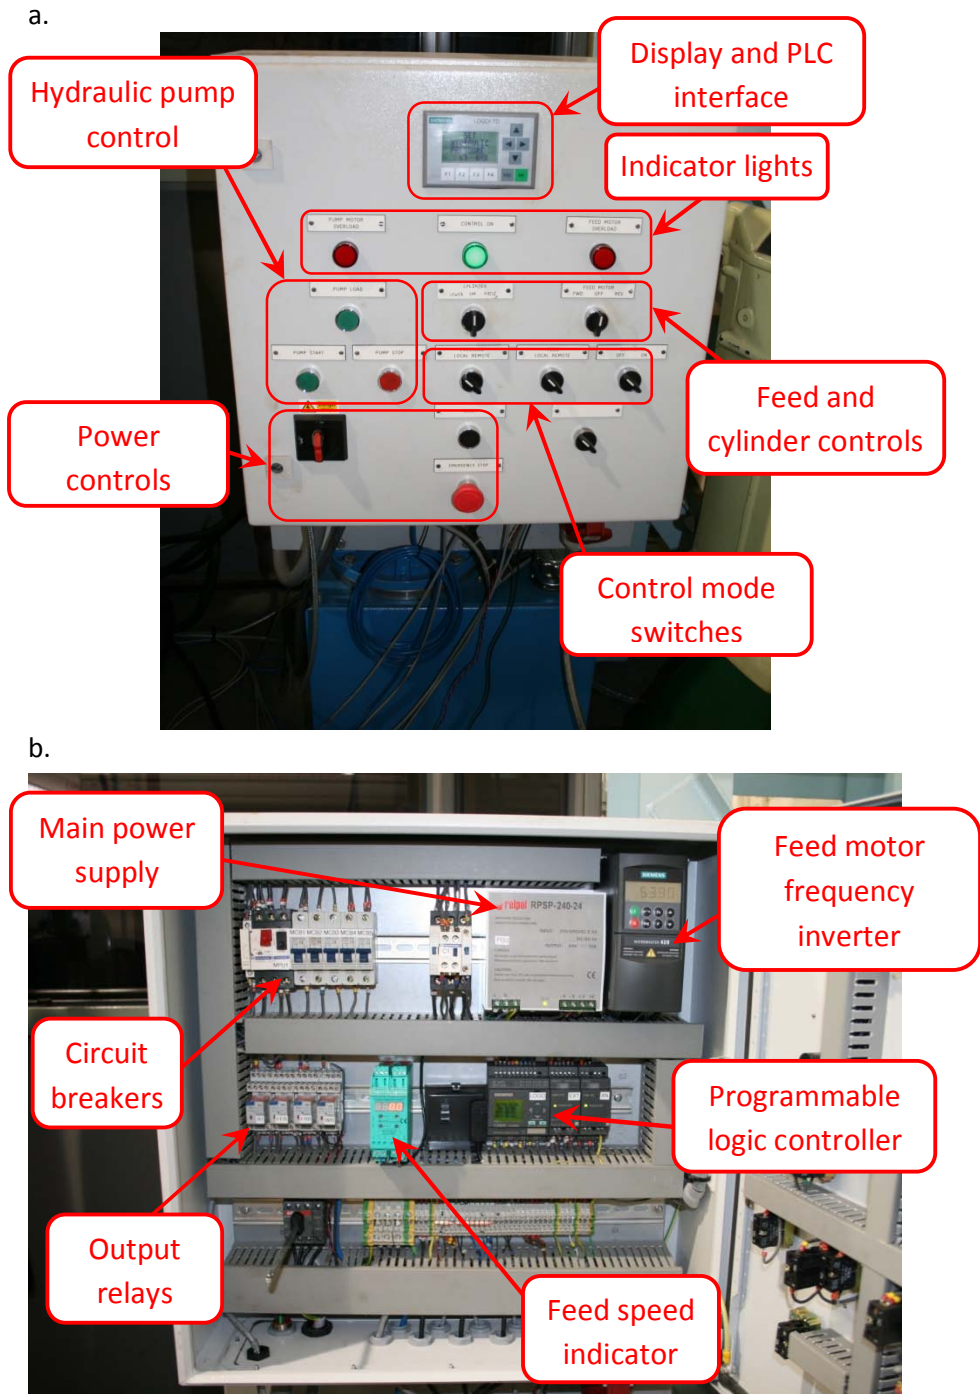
Rolling machine control unit. (a.) Front panel, (b.) internal view.
